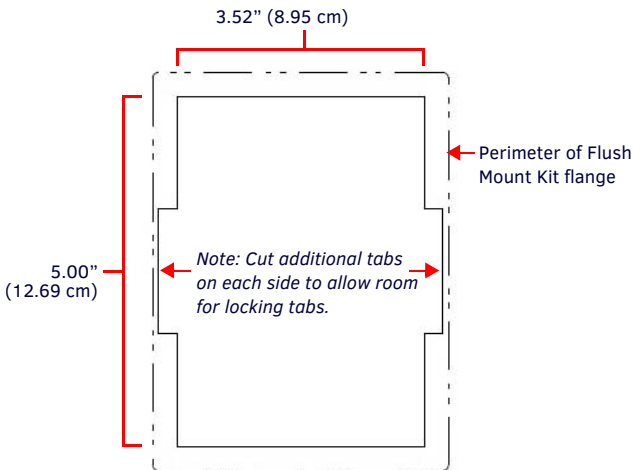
MXA-FMK-43 CUTOUT TEMPLATE
